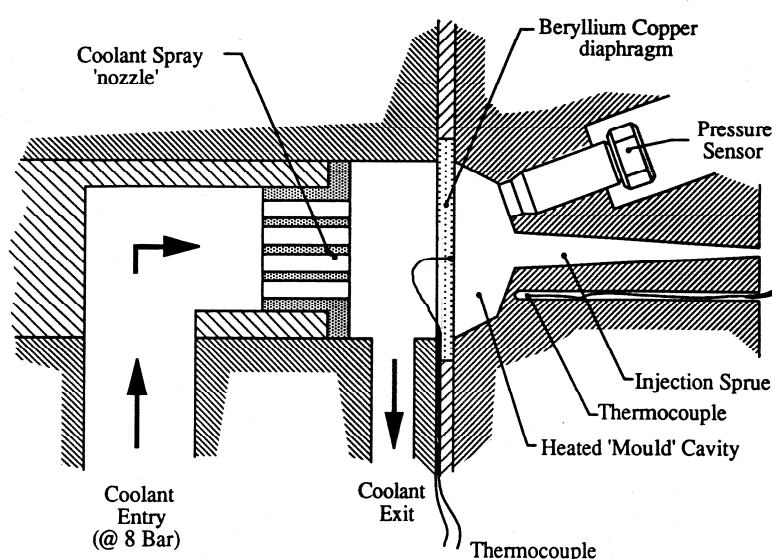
Apparatus for solidification under pressure fitted to the modified injection molding machine
